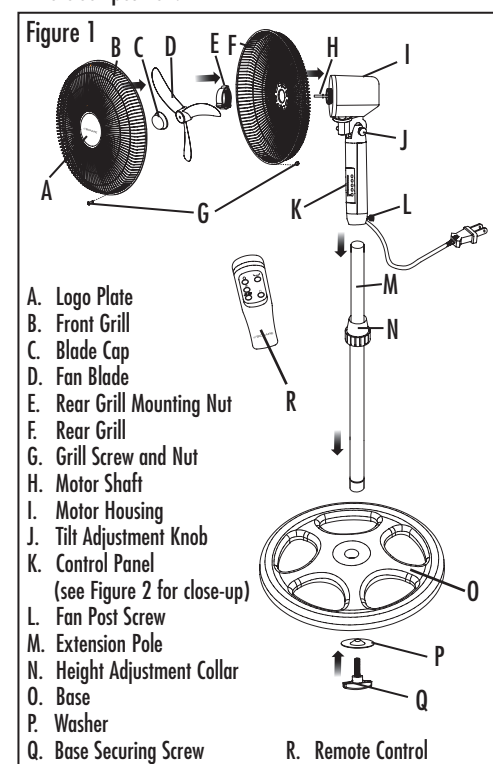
A. Logo Plate, B. Front Grill, C. Blade Cap, D. Fan Blade, E. Rear Grill Mounting Nut, F. Rear Grill, G. Grill Screw and Nut, H. Motor Shaft, I. Motor Housing, J. Tilt Adjustment Knob, K. Control Panel, L. Fan Post Screw, M. Extension Pole, N. Height Adjustment Collar, O. Base, P. Washer, Q. Base Securing Screw, R. Remote Control
